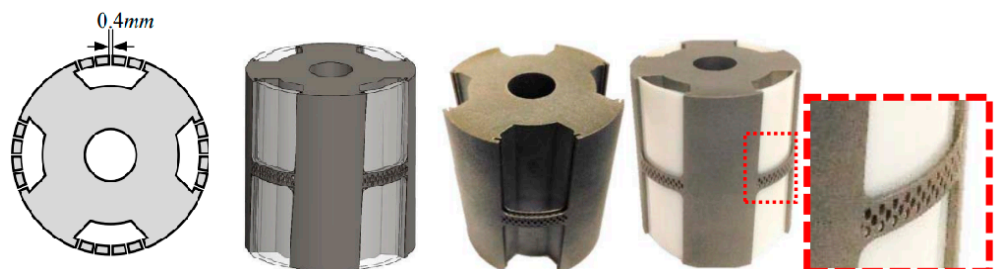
3D-printed SRM rotor with honeycomb rib [41].
